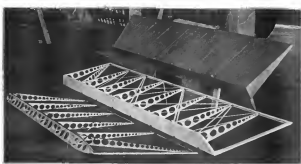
STEEL CONSTRUCTION OF WING AND REINFORCED STRUCTURE
